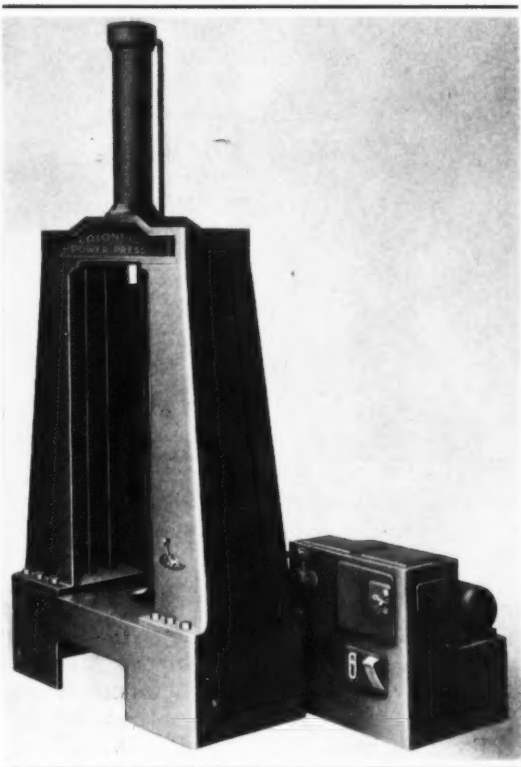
"Power Press" Designed for Internal Broaching and for External Broaching of Surfaces up to 2 Feet Wide
